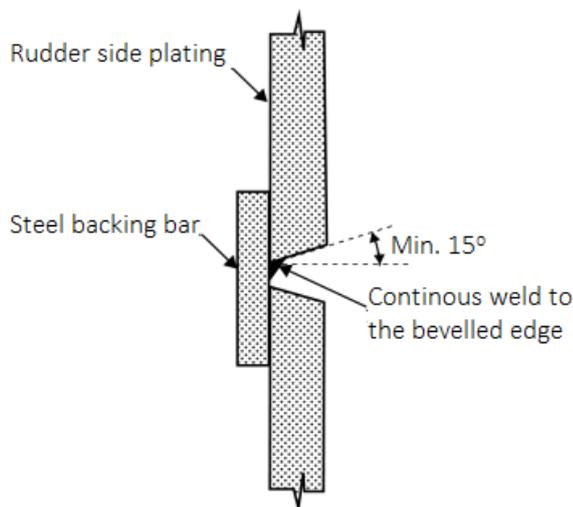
Use of steel backing bar in way of full penetration welding of rudder side plating
